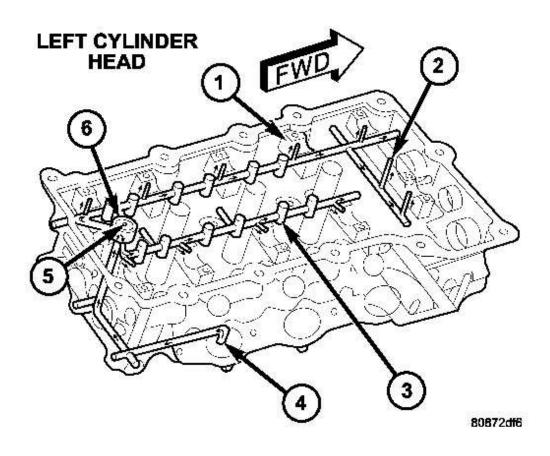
Identifying Cylinder Head Oil Lubrication System - Left Side Courtesy of CHRYSLER LLC
